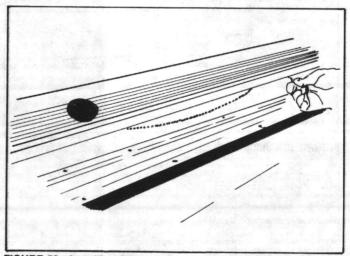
Installing Chain Guide (Type TA Enclosures)
